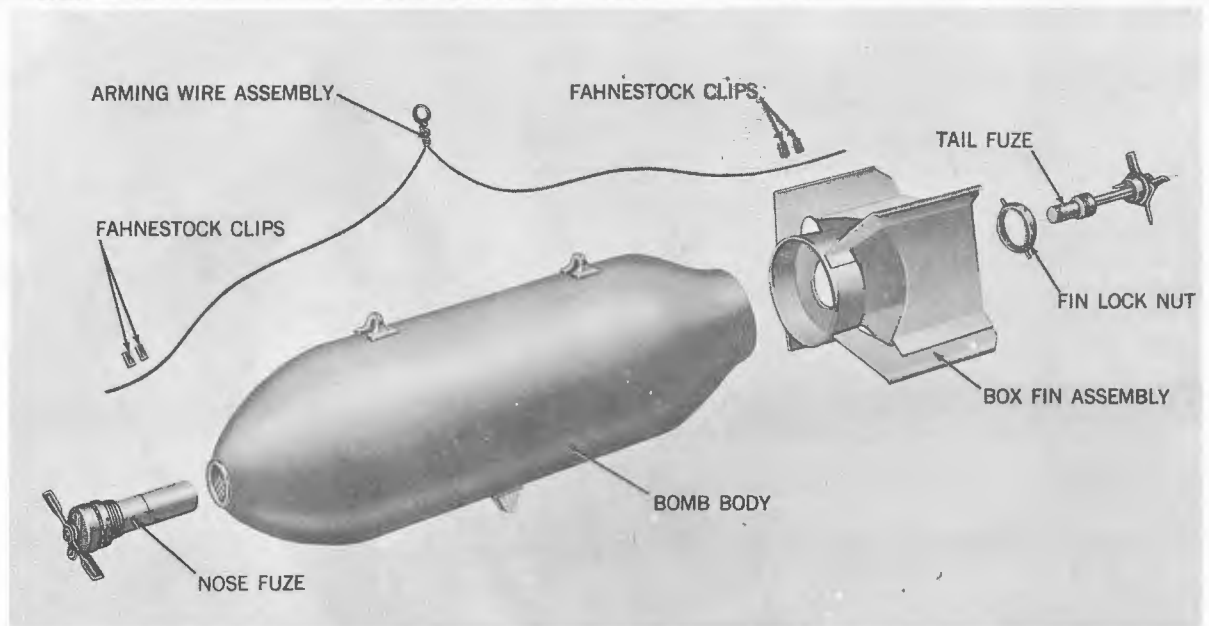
250-lb GP Bomb AN-M57A1 with Fin Assembly AN-M106A1, Exploded View.
